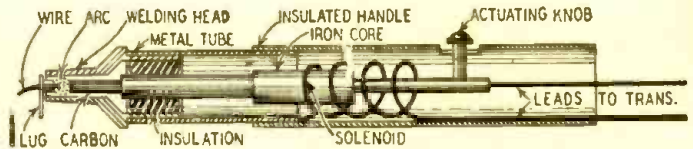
Cross-section view of the small German radio spot-welder. The lug at left end is the work being done, not part of the tool.
